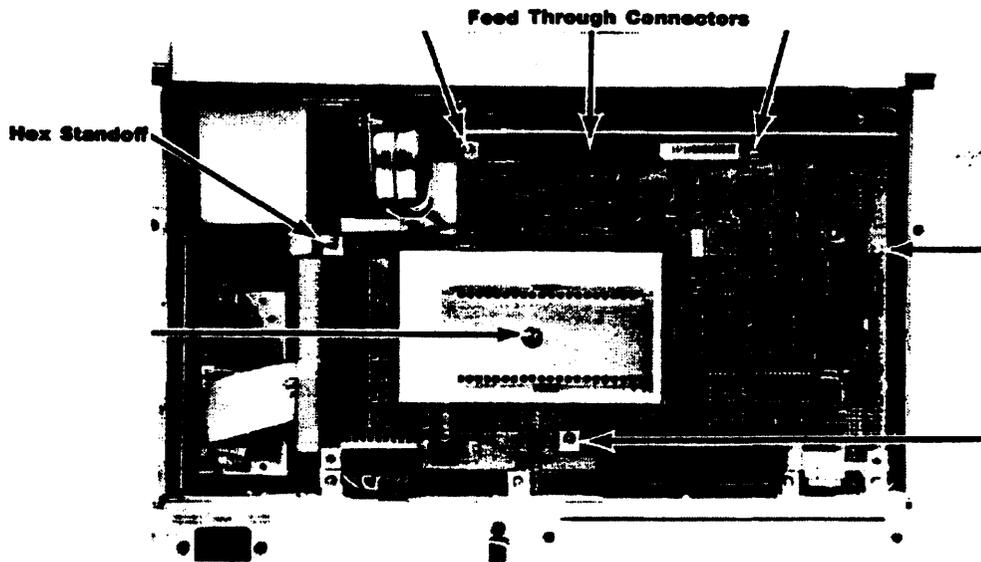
Logic A PCA Mounting Screws and Feed-Through Connector
